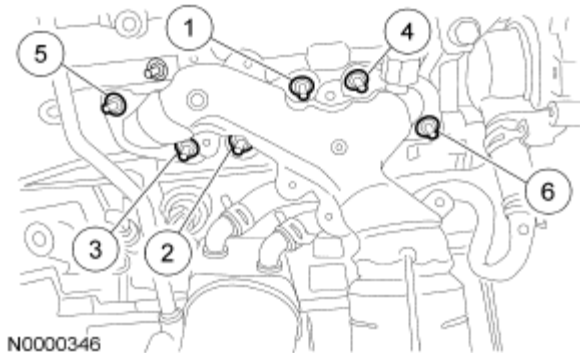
Identifying Tightening Sequence Of Exhaust Manifold Nut
